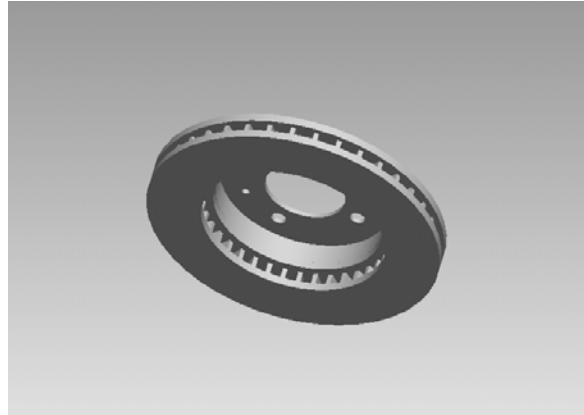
Ventiladed brake disc (specimen with straight and rounded blade).
